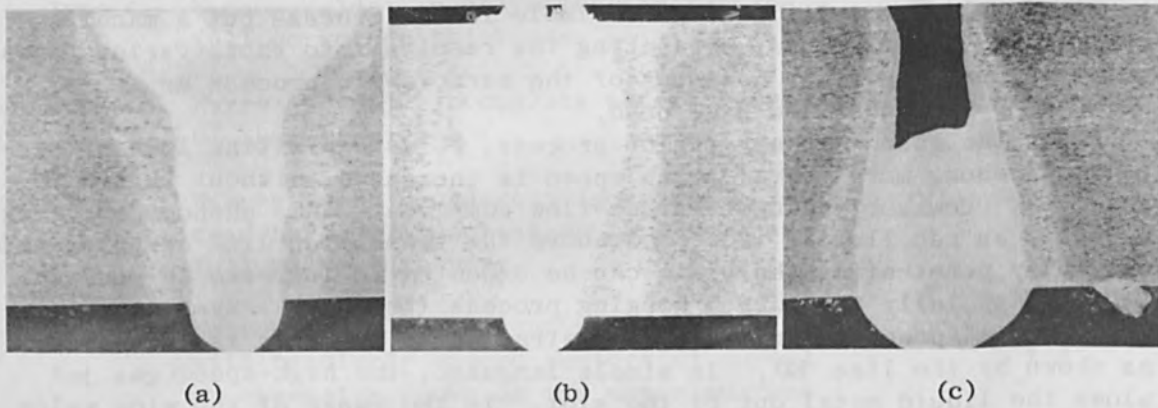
Typical cross sections through welds produced with Beam A of Table I at 136 IPM: (a) wide weld No. 3-6 (110 CFH total effluent gas flow); (b) narrow weld No. 3-7 (125 total effluent gas flow); (c) "gouge" weld No. 3-10 (135 total effluent gas flow).
